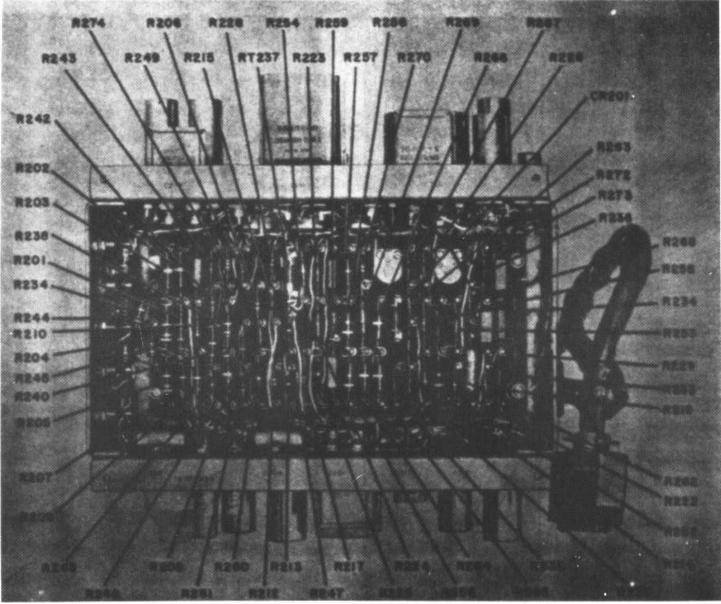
Modulator Chassis, Bottom View (Sheet 2 of 2).
